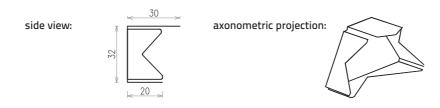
L-02 fastener "IzoGold PIR/PIR+ panel connector"
